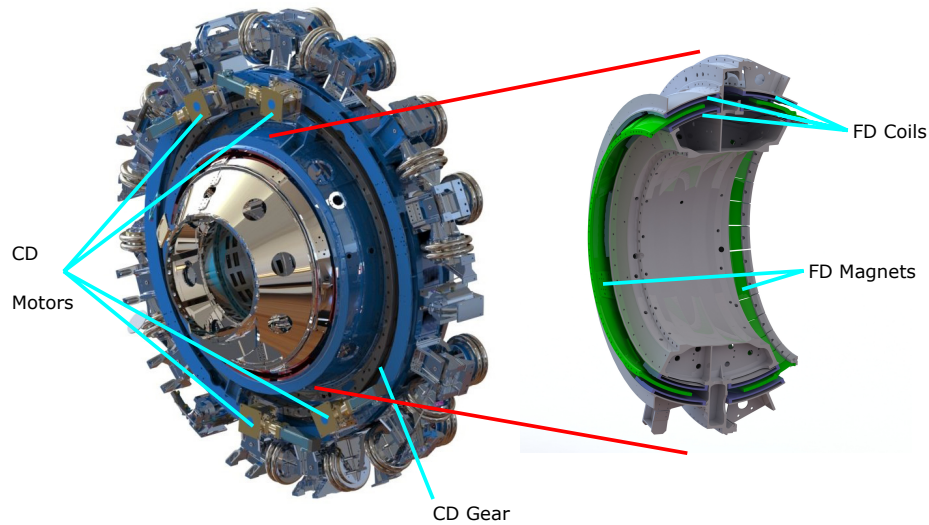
(Color online) The physically interlaced SUA with the position of the coarse drive motors and gear shown within the VIS on the left side and on the right side the FD motors with the actuator coils shown in purple on the stator carrier and the magnets on the rotor shown in green.
